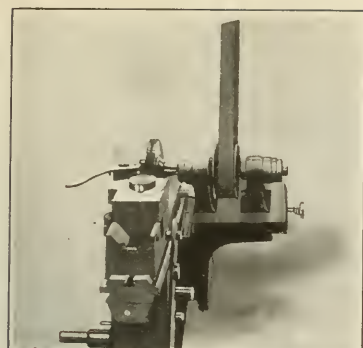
Hand Milling Machine and Straddle Cutters for slabbing Sides of Setting Pin
